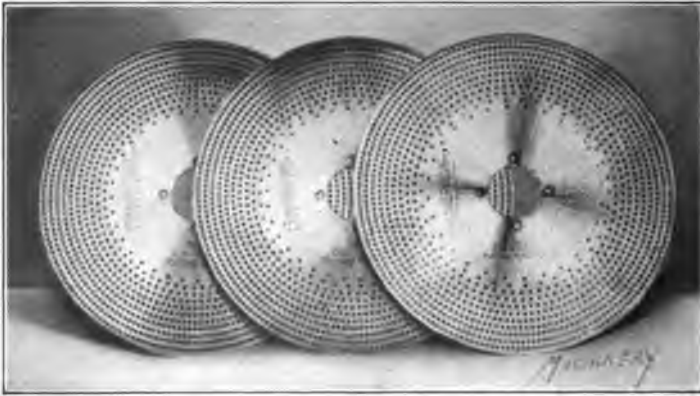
Index Plates for Obtaining a Large Number of Divisions by Simple Indexing
